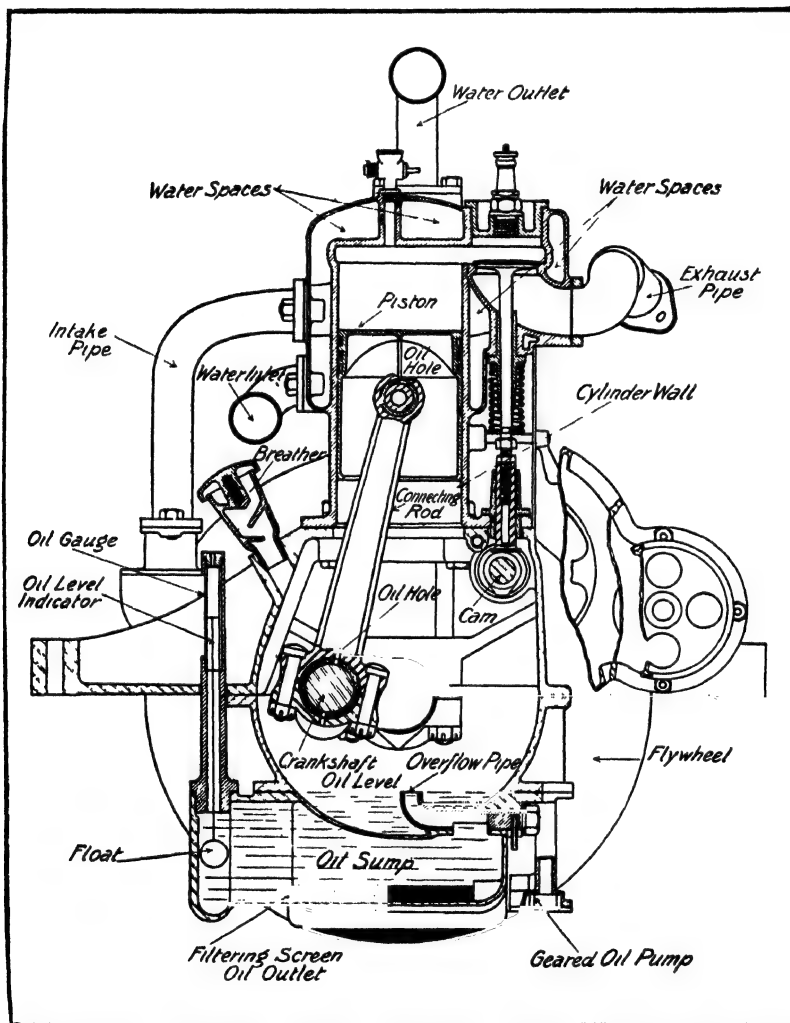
Sectional View of Typical Automobile Motor, Showing Parts Needing Lubrication and the Method of Applying Oil by Constant Level Splash.
